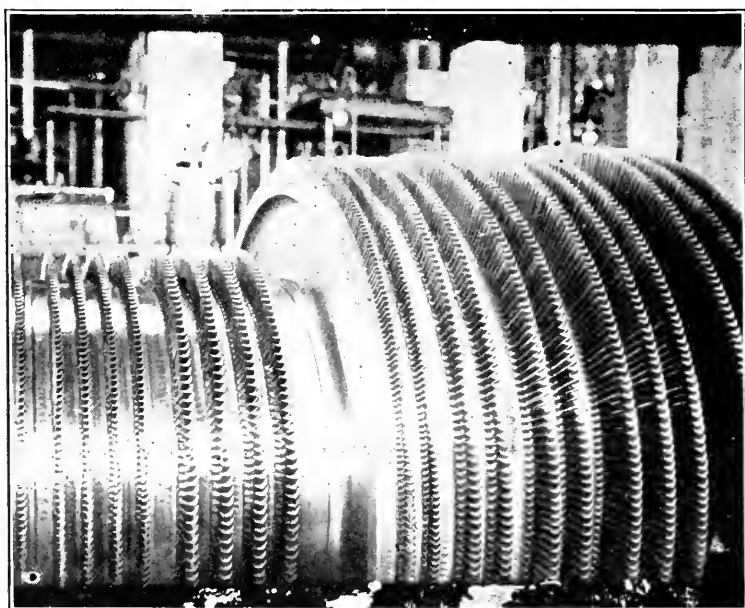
Blading of a Westinghouse-Parsons steam-turbine. Rotor only.
